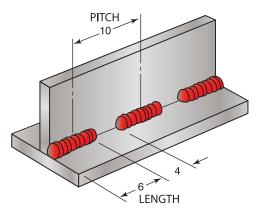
Dimensioning intermittent fillet welds.
